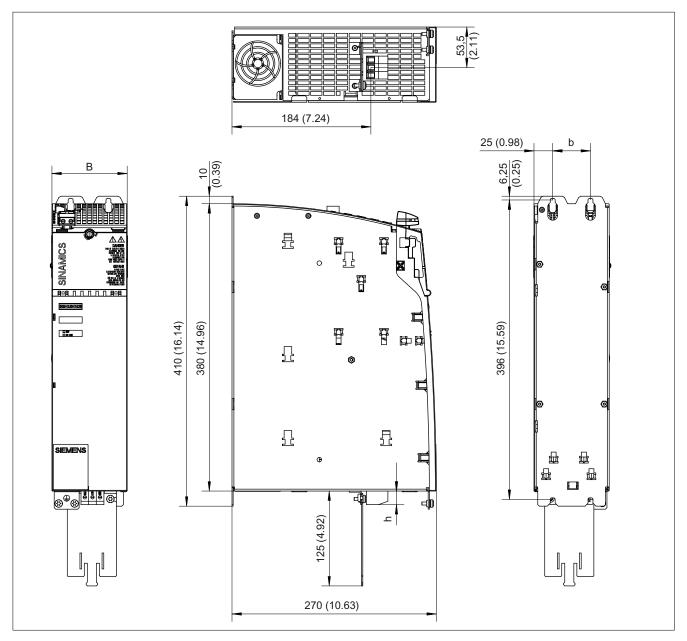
Dimension drawing of 16 kW Active Line Module with internal air cooling, all dimensions in mm and (inches)
